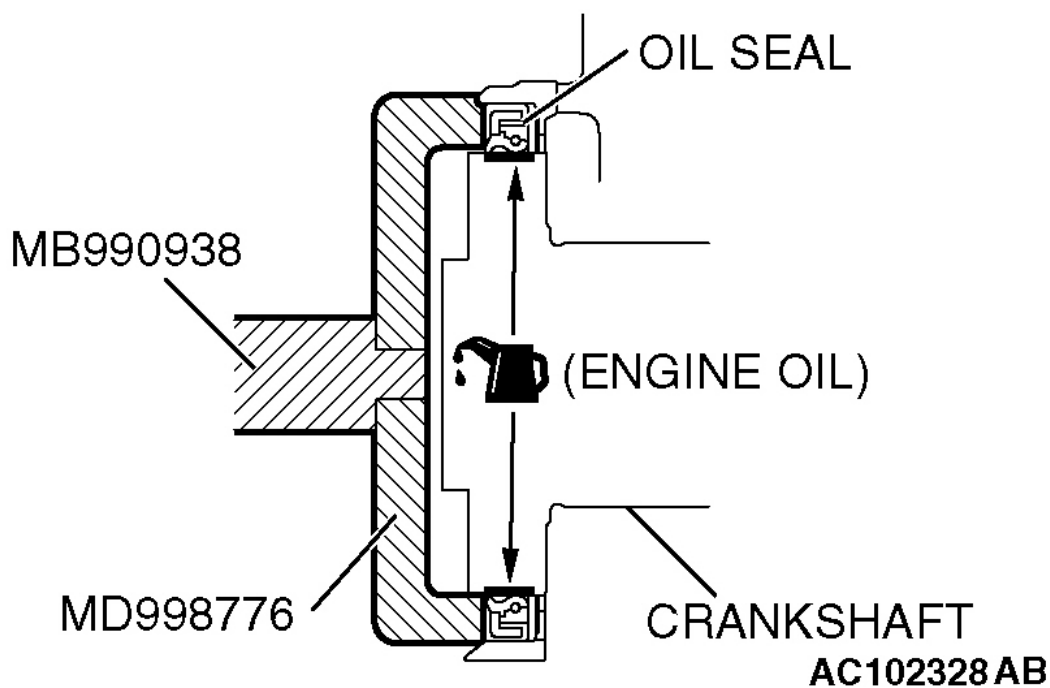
Applying Small Amount Of Engine Oil To Entire Inner Diameter Of Oil Seal Lip
